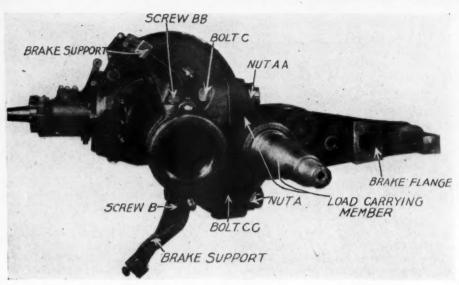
To Separate Live Axle From Load Carrying Unit Remove Nuts "A" and "AA" and Bolts "C" and "CC"
